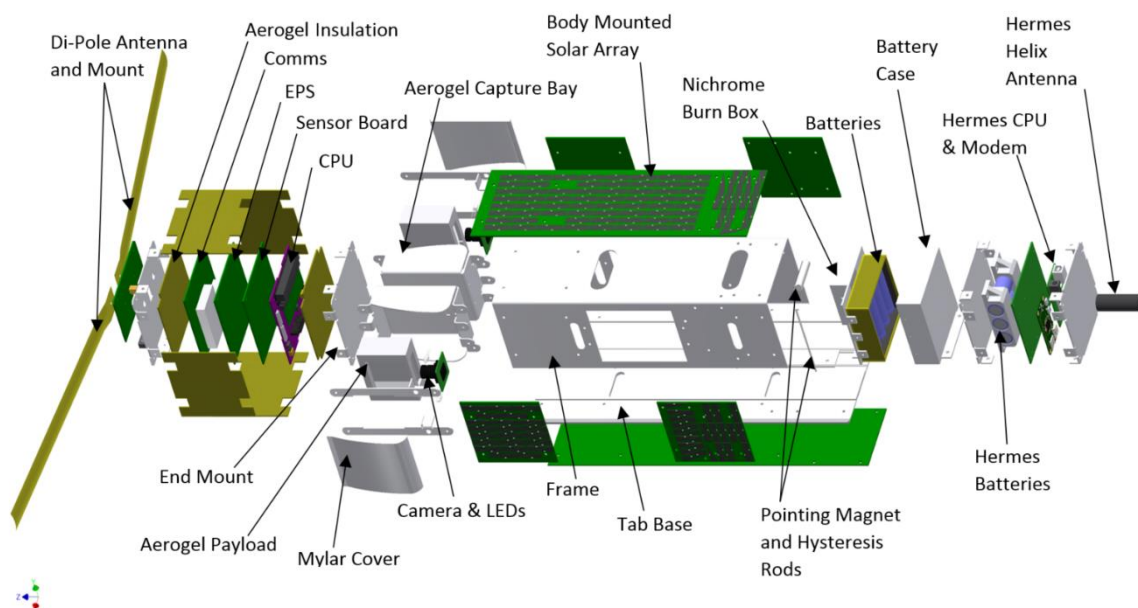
CAD Explosion of CACTUS-I CubeSat
